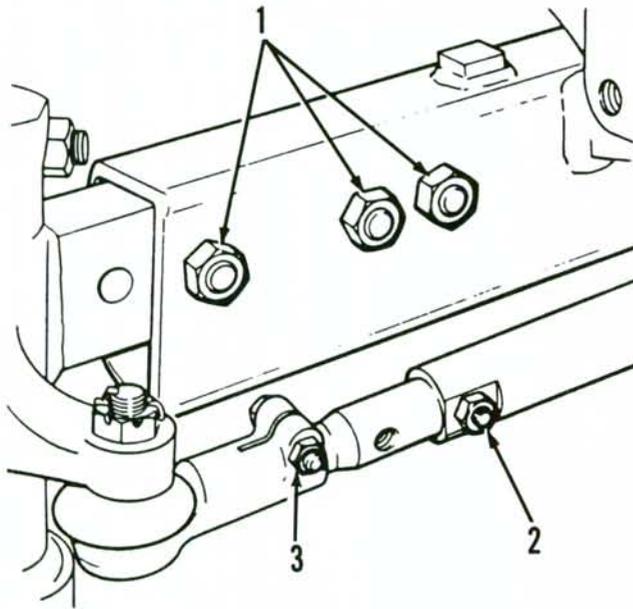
View of axle left end typical of type used on 399 models. Right side is equipped with a similar track rod, adjusting bolt (2) and rod end. Rod end may be locked with clamp bolt (3) as shown or jam nut.
